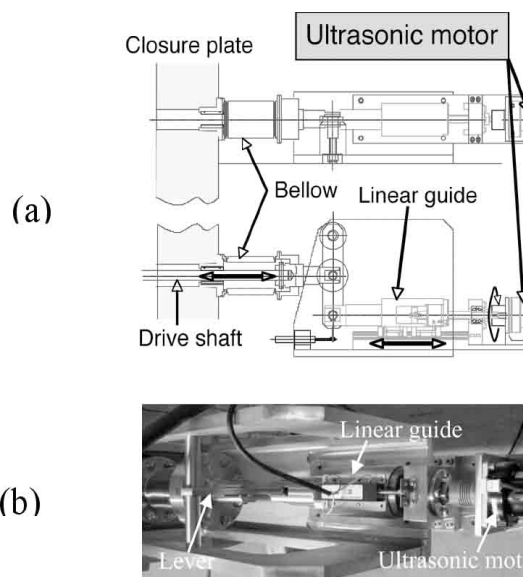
Drawing and the photograph of the actuator mock-up for the steering mirror. (a) Drawing and (b) photograph.
